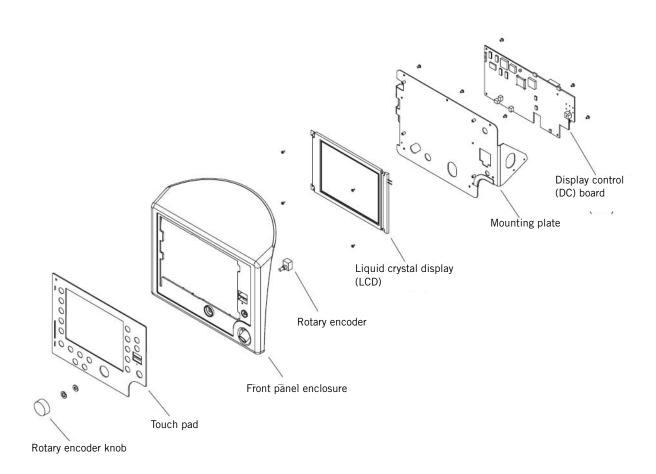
BiPAP Vision Front Panel Assembly Exploded View
